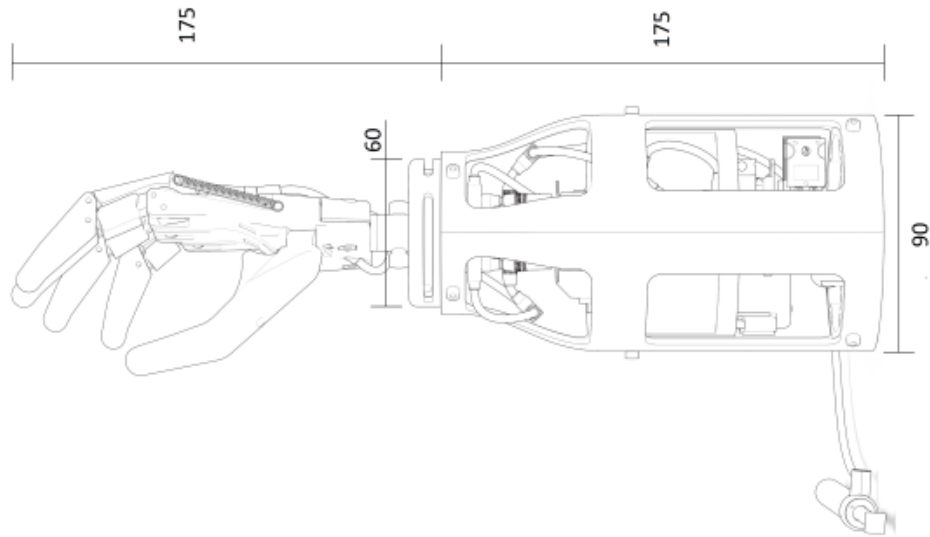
Line drawing with the major dimensions of the prosthesis in mm.
